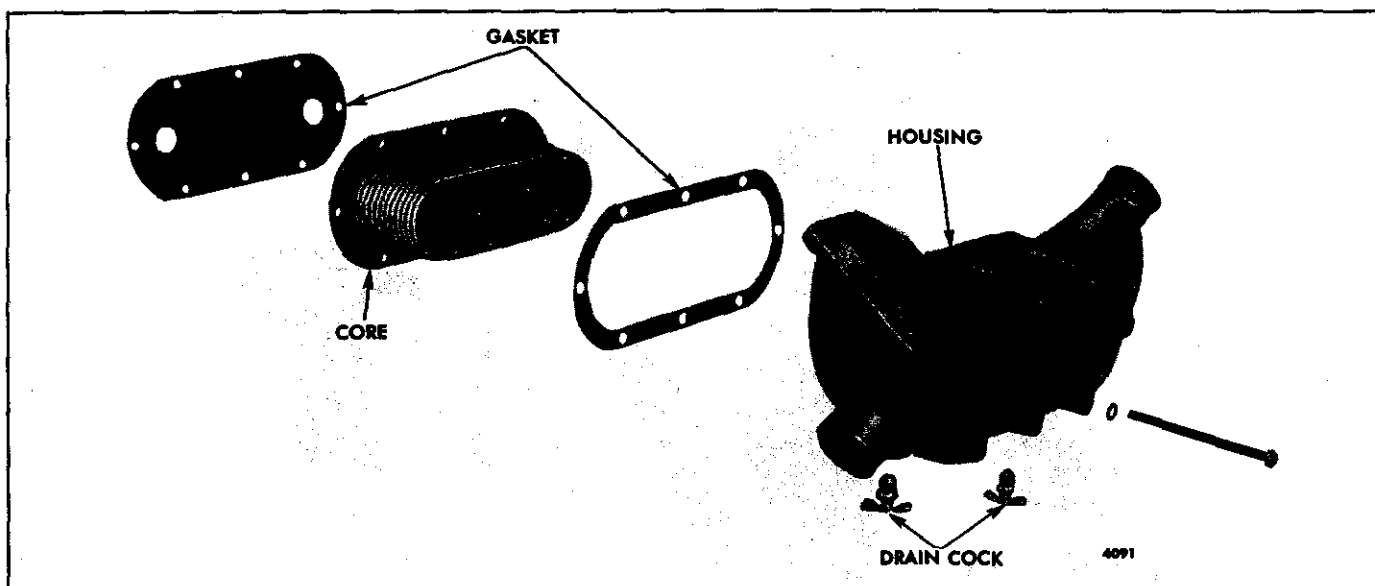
Oil Cooler Details and Relative Location of Parts (6V or 8V engine)
